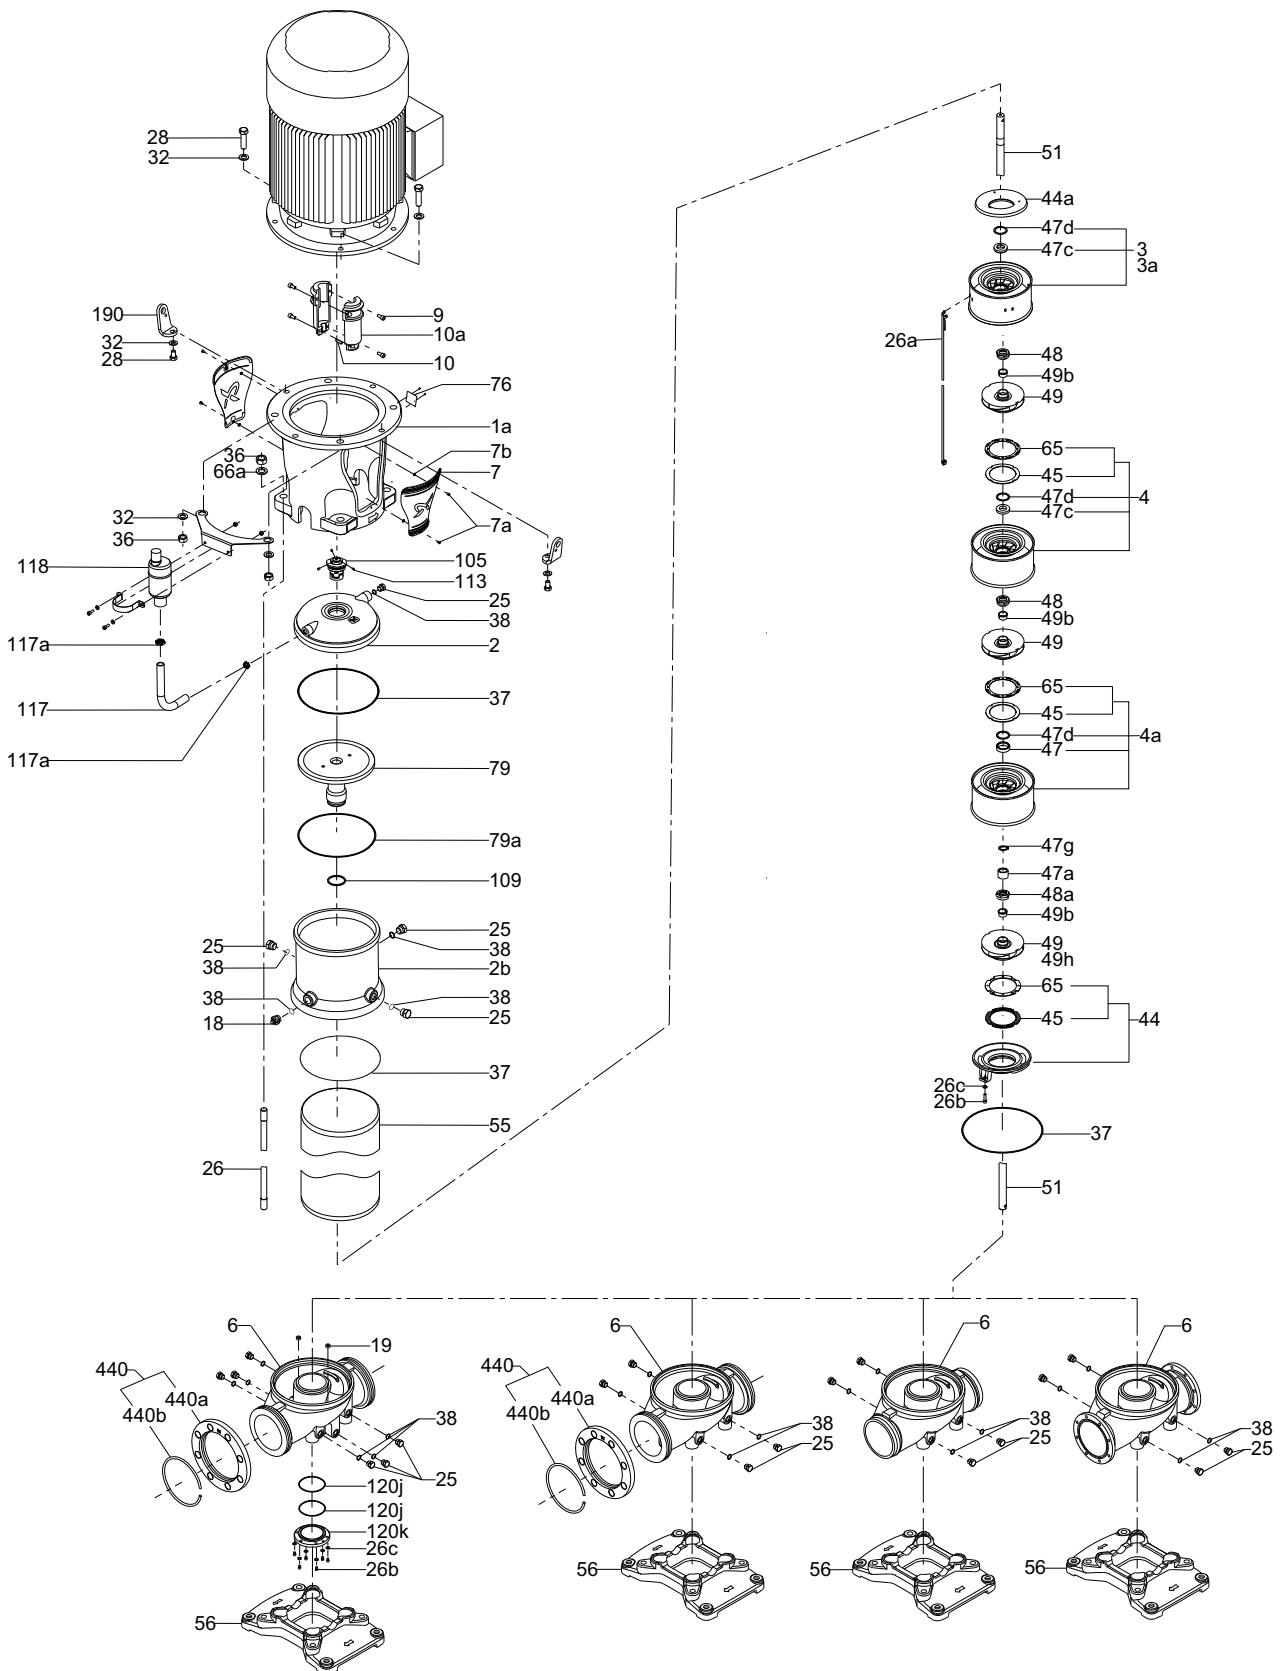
Exploded view of CR, CRN pump with air-cooled top
